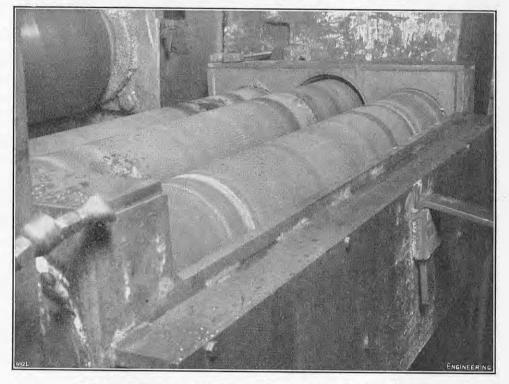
INTERSTAND TENSIOMETER INSTALLED IN TANDEM MILL.
